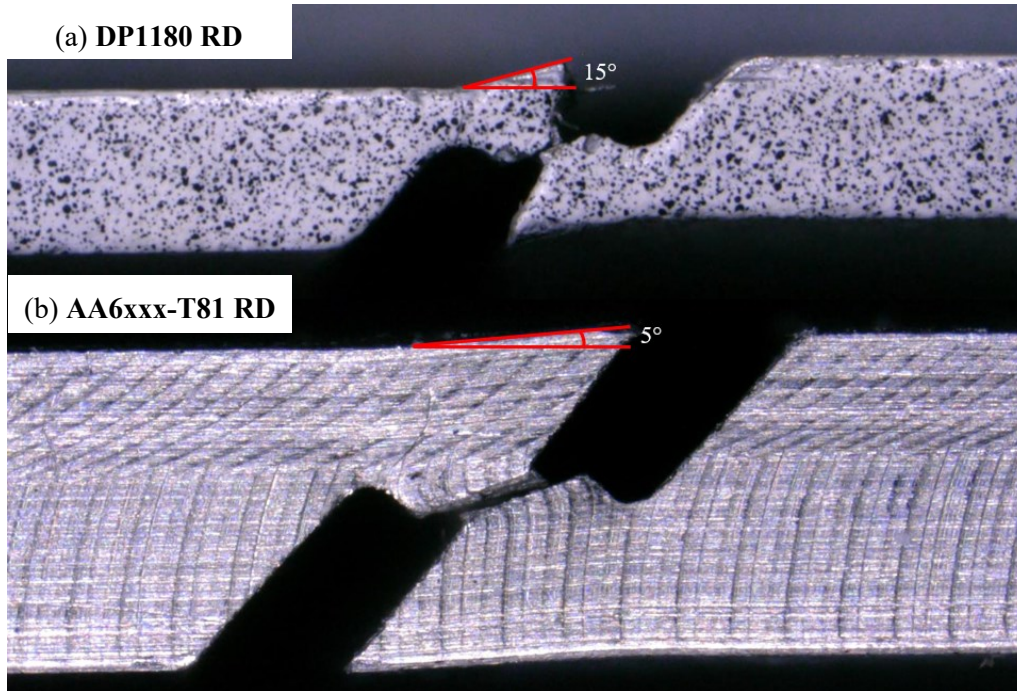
Post-mortem optical microscope measurements of through-thickness shear specimen rotation. (a) The DP1180 specimen, clamped with a force of 12 kN, rotates more than the (b) AA6xxx-T81 specimen, clamped with a force of 6 kN. Significant bending and deformation occur at the notches in the DP1180 tests, resulting in the combined tensile-shear loading measured at the center of the gauge region.
